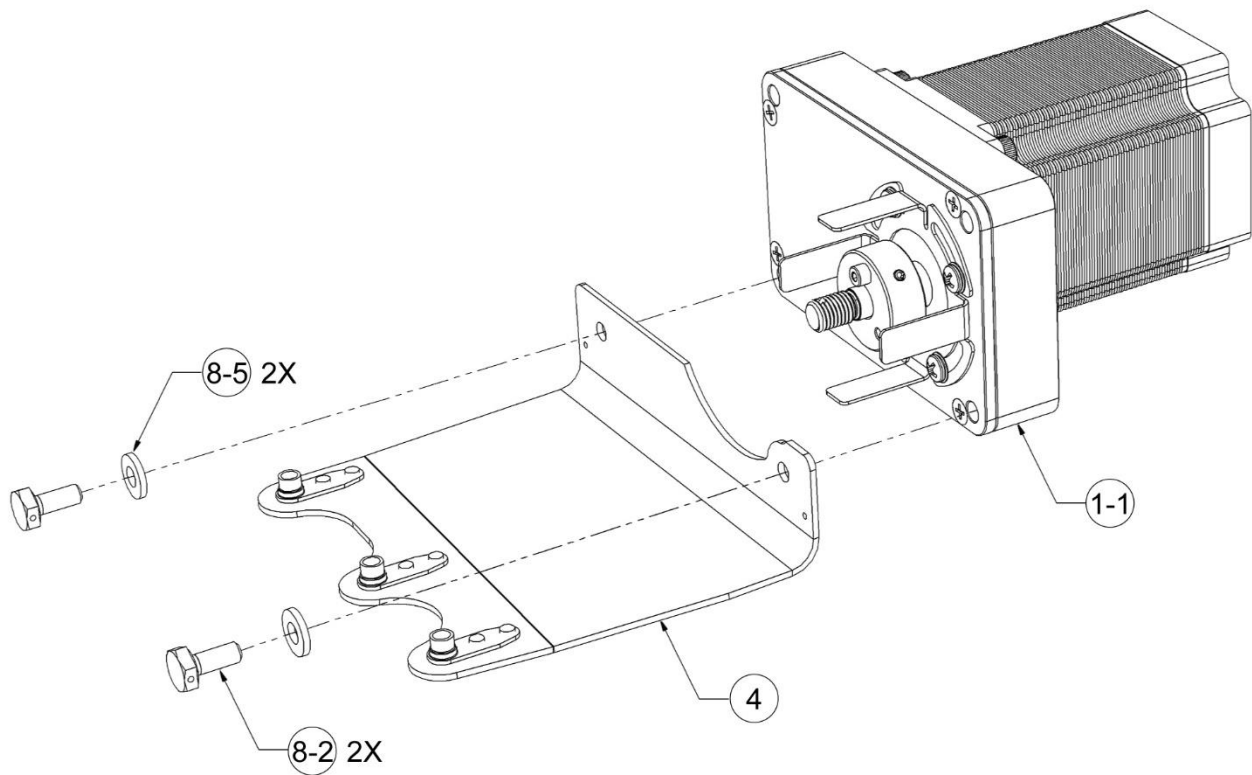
Attaching Lower Roll Servo Bracket to Roll Servo
